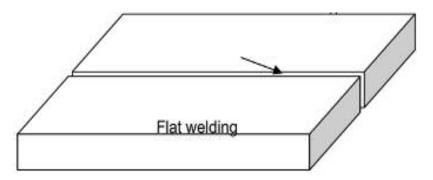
Scheme of placement of components to be welded for flat welding
